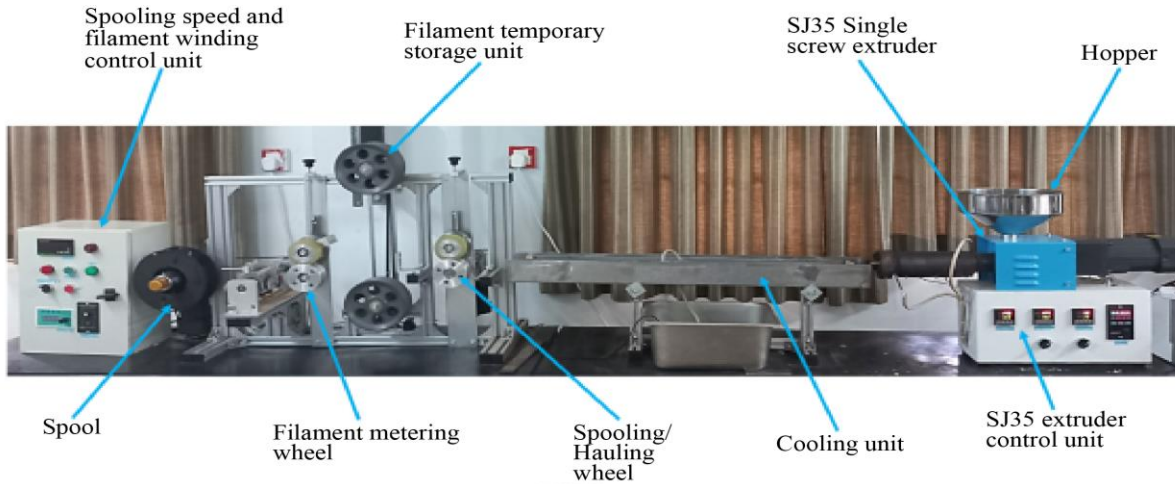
SJ35 3D Printing Filament Making Machine Assembly [38]
